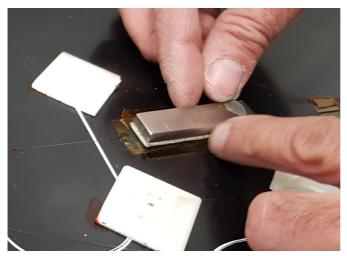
Aligning the rubber and stiff auxiliary piece.
